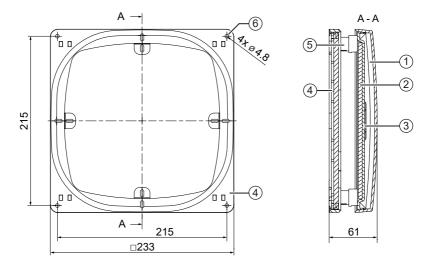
Dimensional drawing of Flair V-233x233 inner cover
